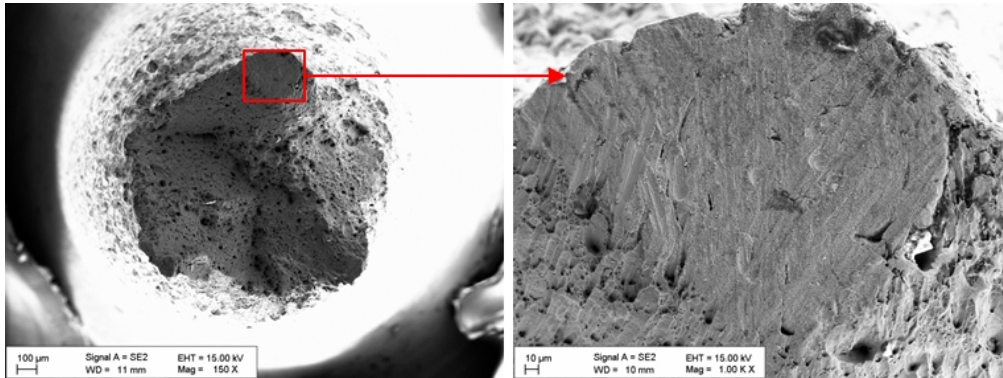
SEM images of fracture surfaces for 316L specimens after the SSRT tests at 550°C in air.
